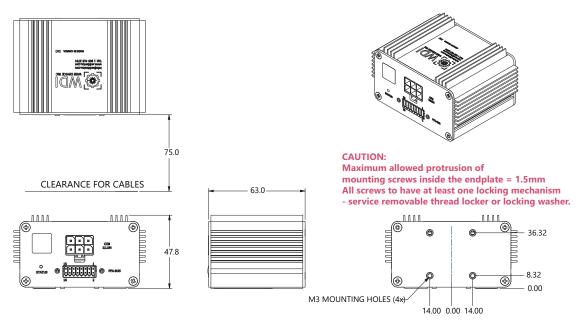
PFABUS COB Controller Dimensions – PBI Mounting
